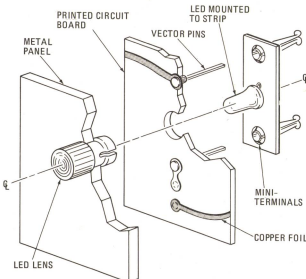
LED LENS ON THE FRONT PANEL mates with the PC board and the lens on its mounting strip.
